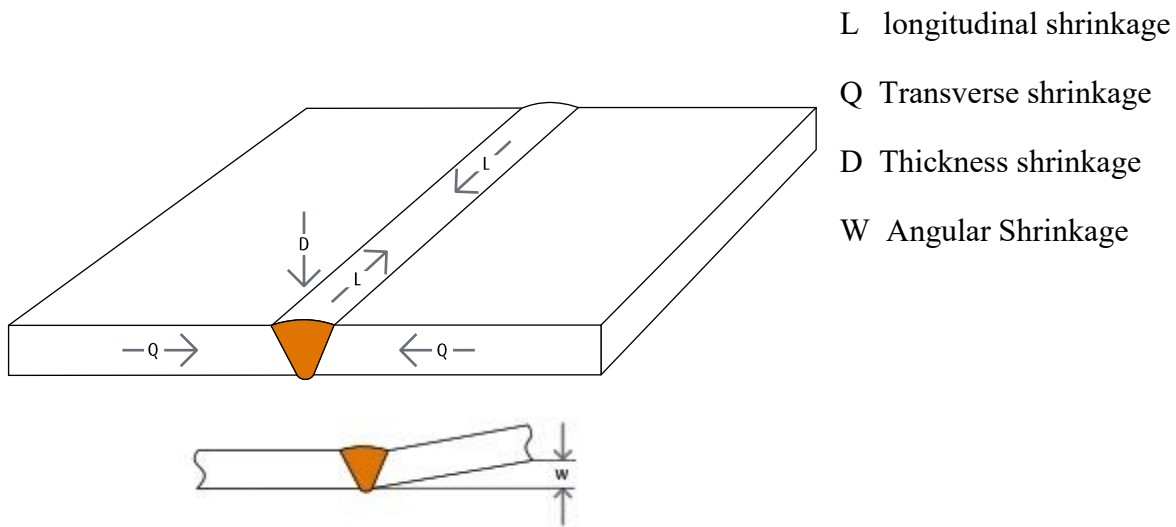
Types of shrinkage during welding.(Bocoline 2009)
